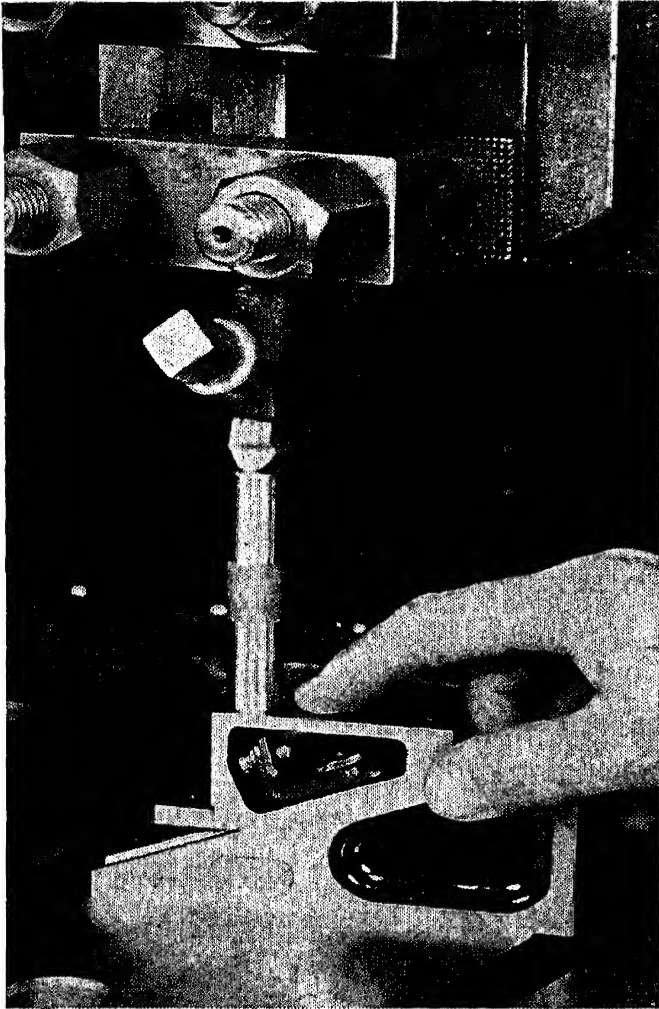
A planer tool being set by means of a planer and shaper gage. (Courtesy The L. S. Starrett Co.)
